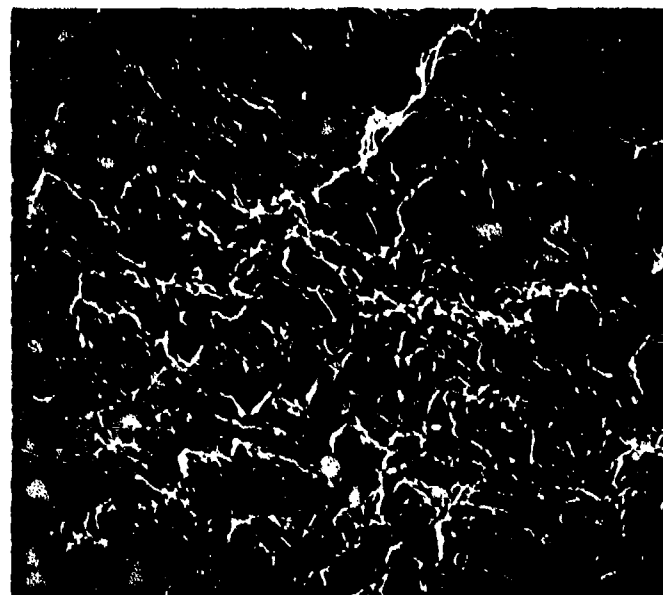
Fatigue region of fracture surface of an A-514 weldment containing LOP, 1700x.
